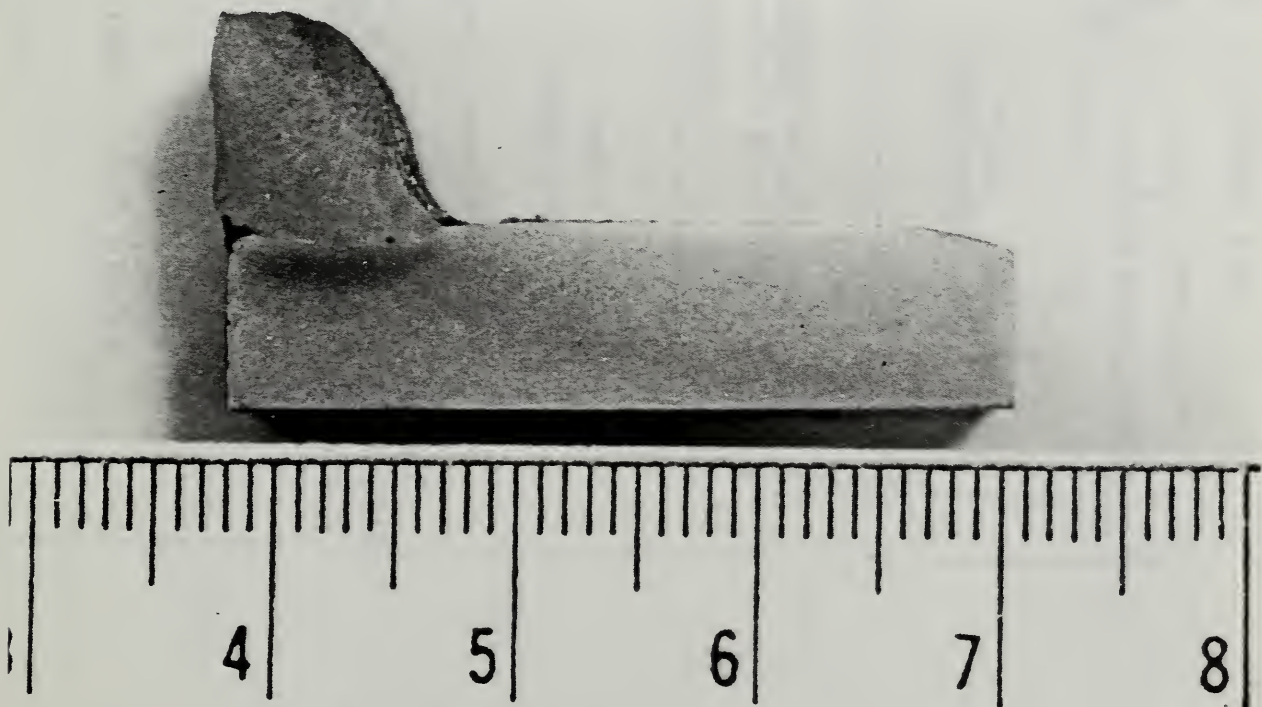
Metallographic cross section of failed weld along weld/column interface - specimen NBS 33A
